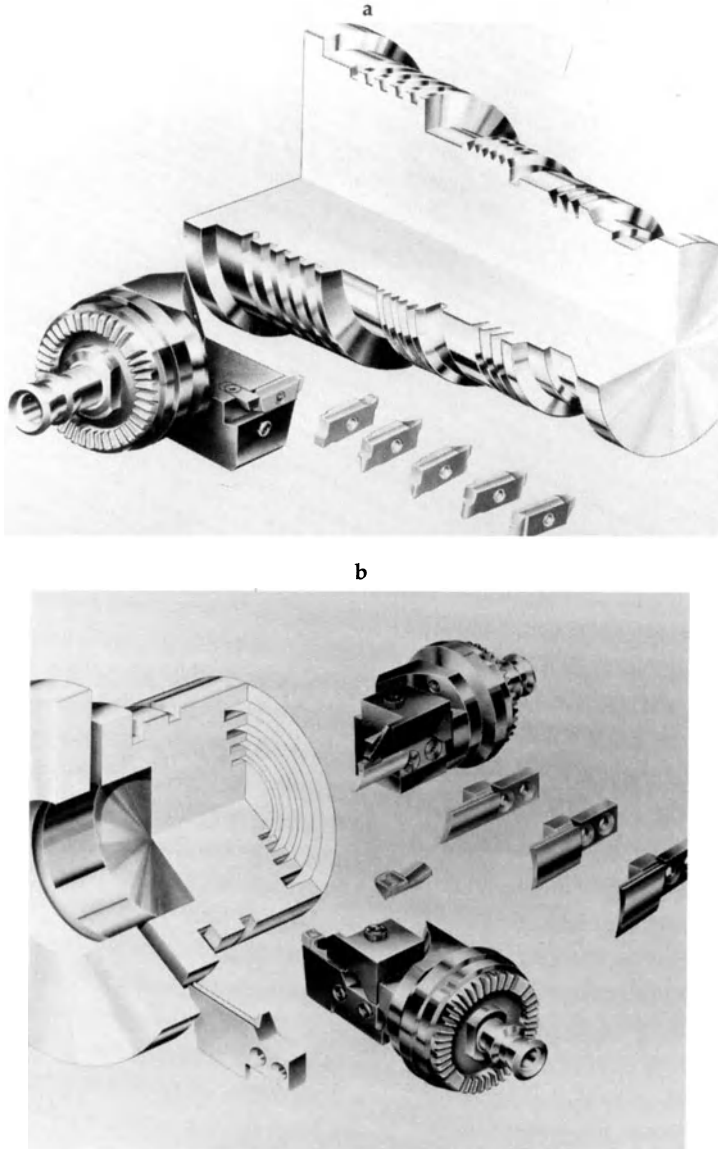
a Grooving operations on diameters using a modular quick-change tooling system with a Hirth coupling adaptor. b Face and diametral grooving operations together with parting-off can be achieved with the minimum of tool holders. [Courtesy of Walter Cutters.]
